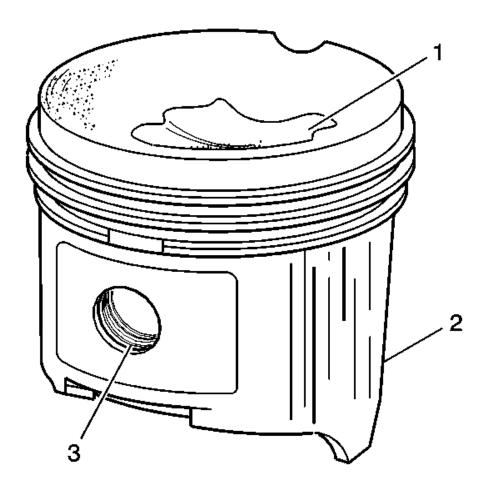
Identifying Piston Damage Inspection Areas Courtesy of GENERAL MOTORS CORP.
